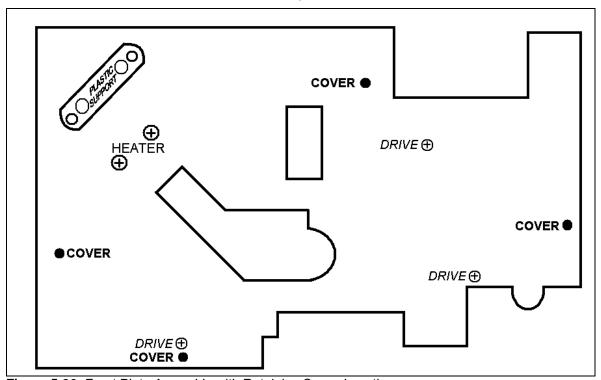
Front Plate Assembly with Retaining Screw Locations
